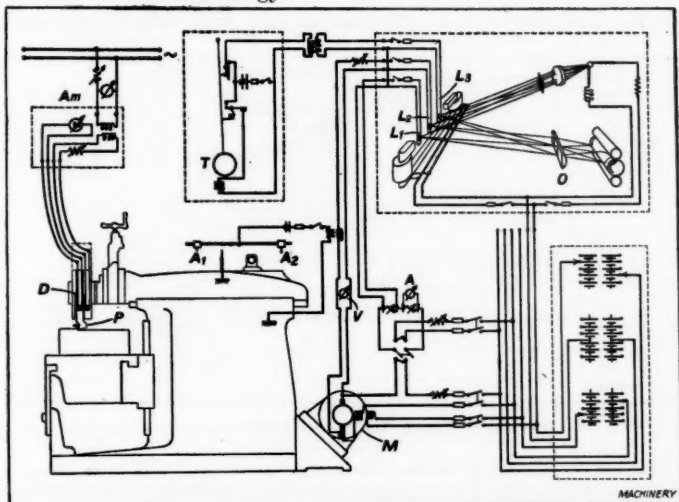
Diagram showing the equipment employed for testing shaping machine.
